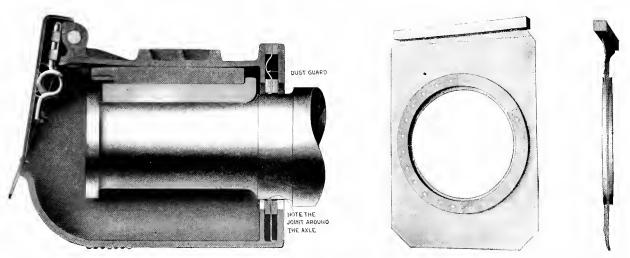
Symington Journal Box Equipped with Symington Flexible Dust Guard.
